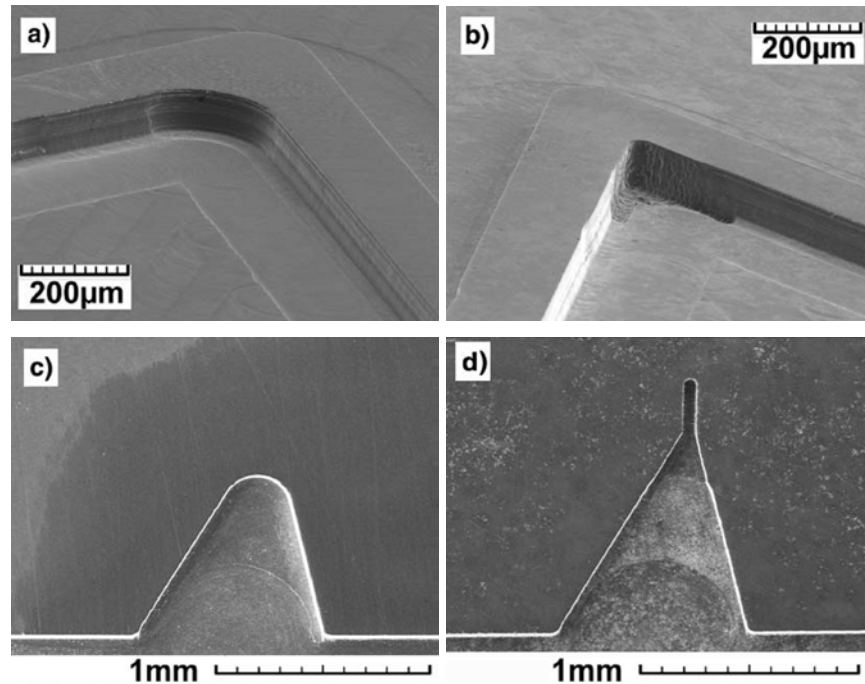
Two examples of micro hybrid tooling for micro fluidics application where the milled main shape (details (a) and (c)) is finished with an ECF machining step (details (b) and (d)) [Staemmler, 2007].
